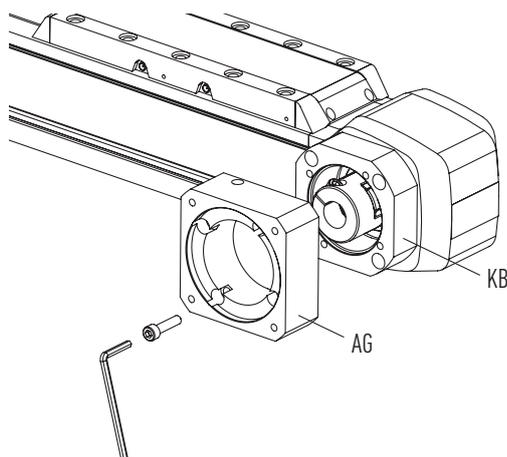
Mounting the gear adapter plate AG – HM060B, HM080B, HM120B
